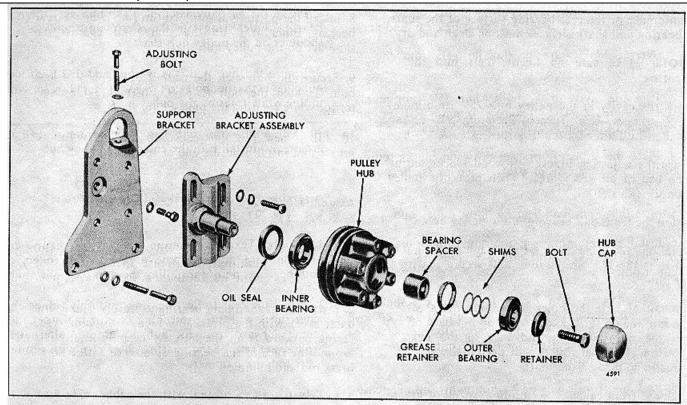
Fan Pulley, Hub and Adjusting Bracket Details for compact Front End Engines.
